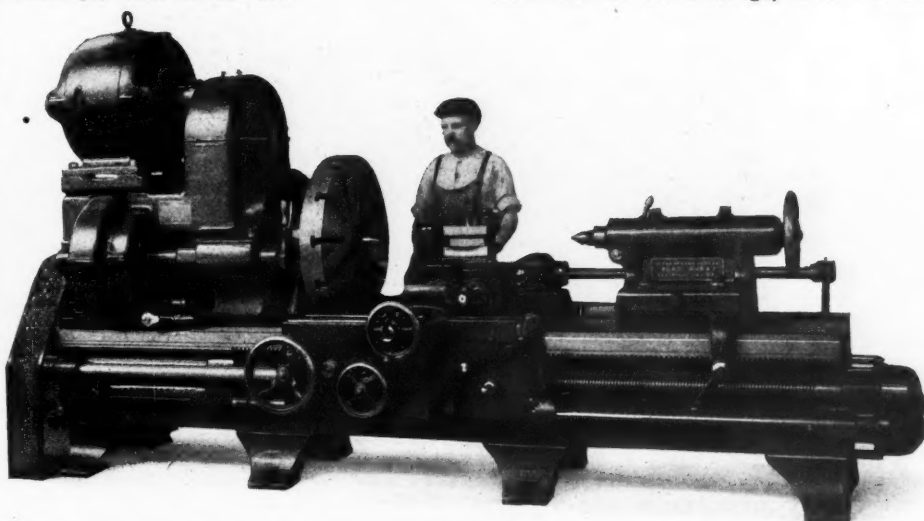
Niles-Bement-Pond 30-inch Double Back-geared Lathe equipped with Attachment for cutting the Waves and Band Seats in Shells
